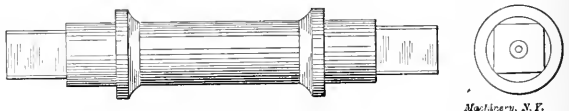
Axle Milled in Fixture shown in Fig. 25.
